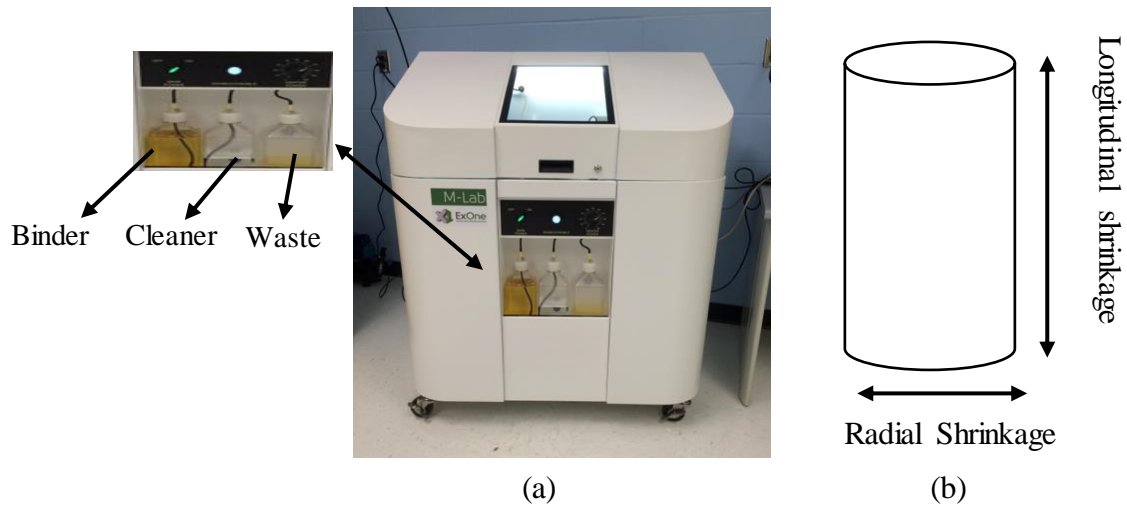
(a) ExOne M-lab machine, (b) Radial shrinkage and longitudinal shrinkage directions
